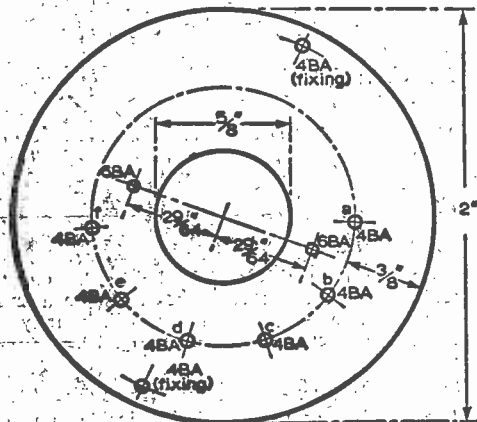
(above) Drilling details of the paxolin panel; 11b (right) complete wiring diagram of the probe.
